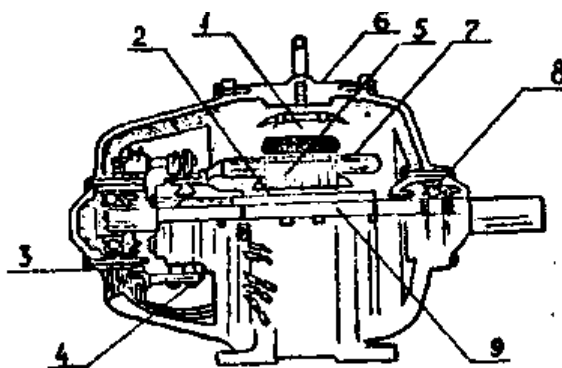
Fig. I. A ball-bearing fully-enclosed fan-cooled direct-current motor:
